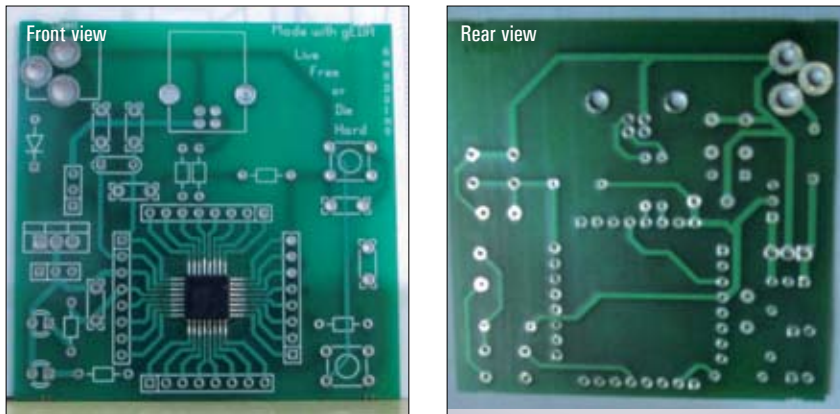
Machine-fabricated board designed by author (AT90USB162 mini development board)
